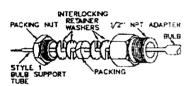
Part Number FTG13A-600R packing nut assembly. (Use with Style 1 bulb with support tube for direct immersion applications.)
